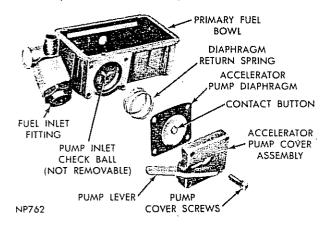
ACCELERATOR PUMP, DISASSEMBLED BALL CHECK VALVE
